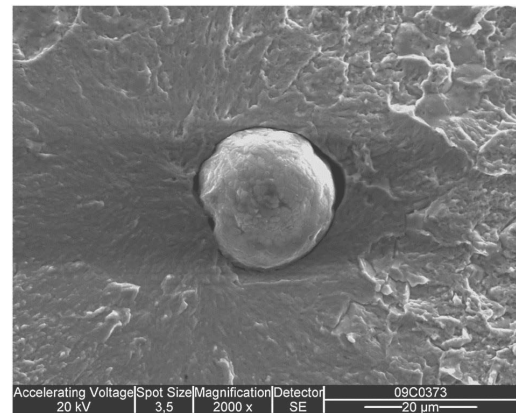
A scanning electron microscope picture of an inclusion found on the surface of the fatigue test bar fracture surfaces.
